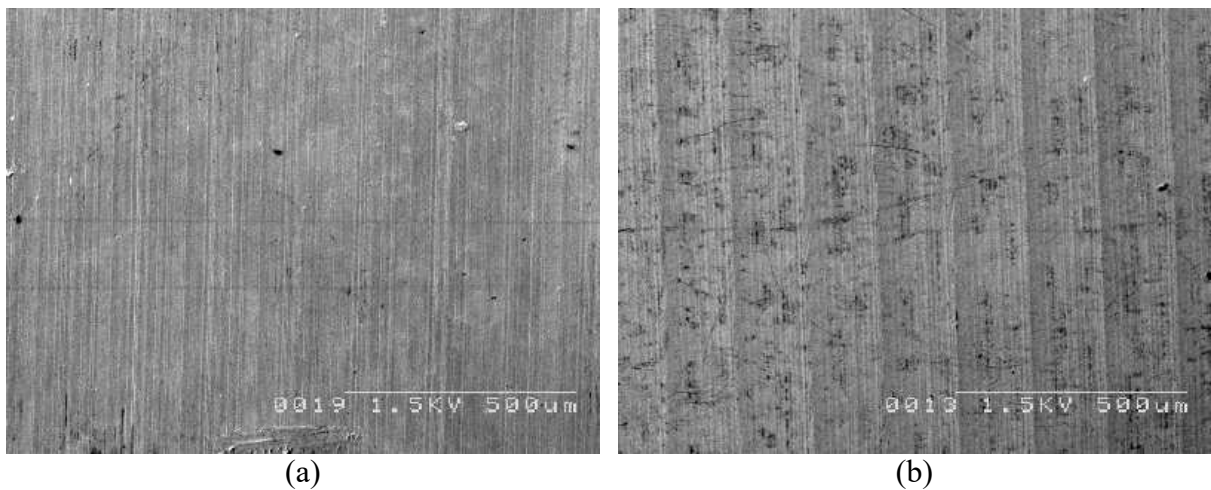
Surfaces generated after machining with uncoated carbide T1 tool with a coolant pressure of 11 MPa at cutting speeds of (a) 110 m min^{-1} and (b) 120 m min^{-1} .
